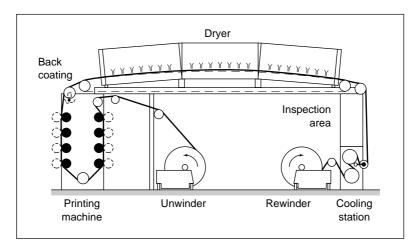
Rotary-screen printing machine for transfer paper (Johannes Zimmer)
